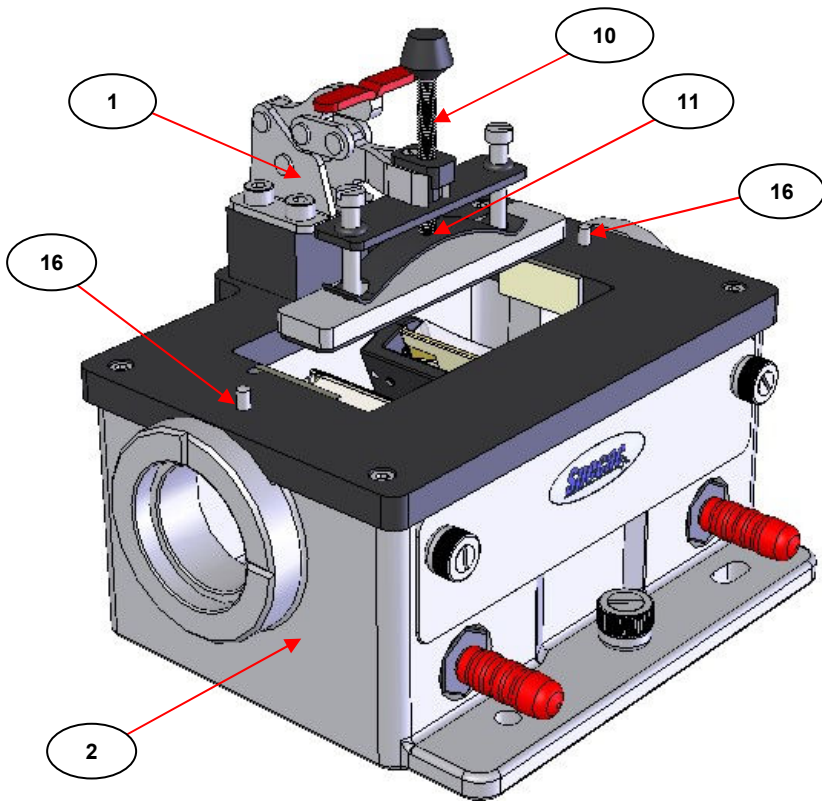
Gateway™ ATR Clamp Assembly Fitted to the Optical Unit
